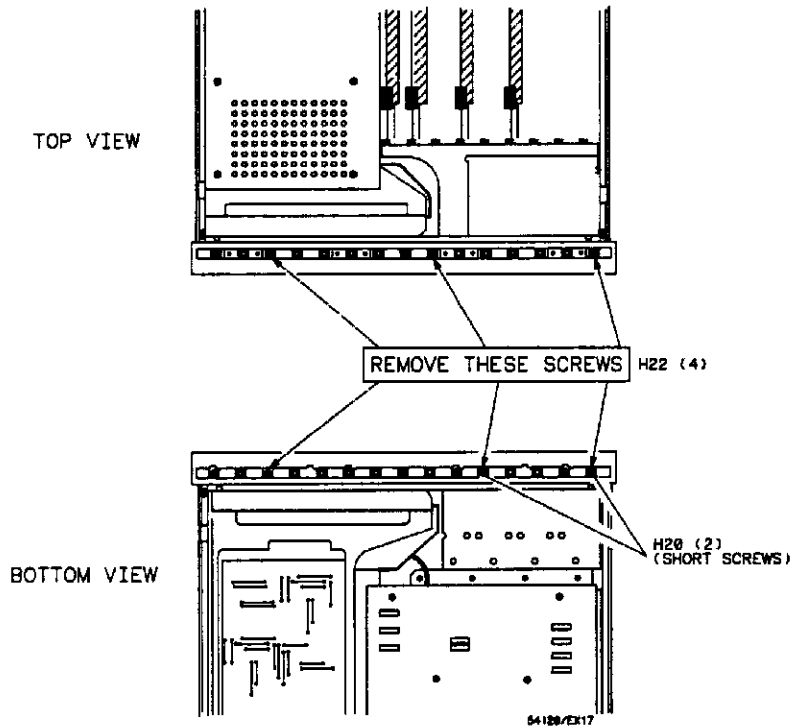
A-4. Top and Bottom Front Panel Mounting Screws.
